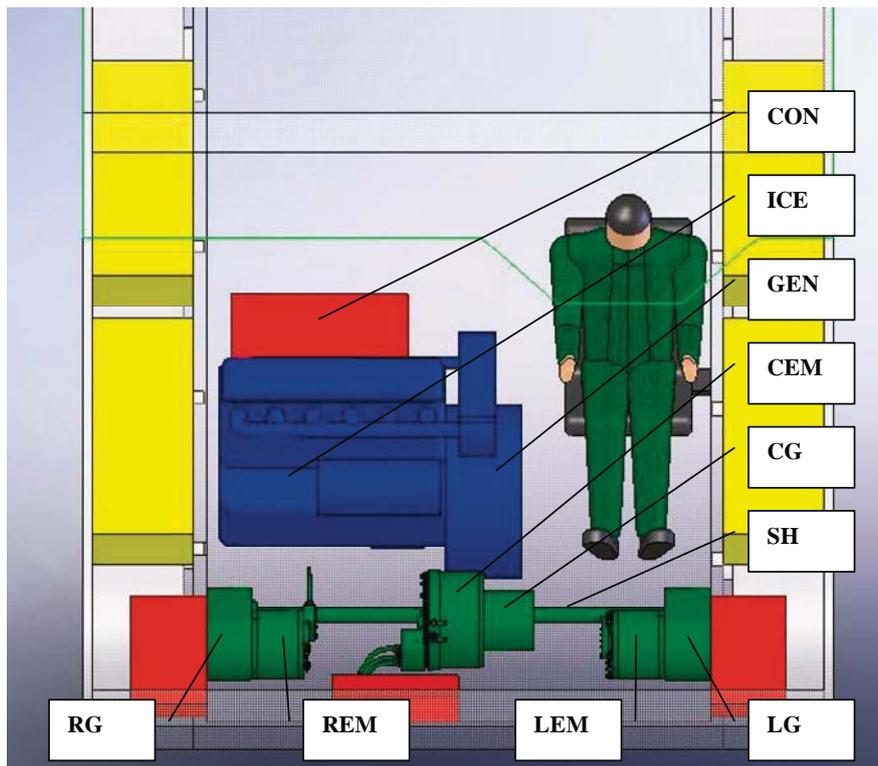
Hybrid electric drive components location: RG – right gearbox, REM – right electric motor, LEM – left electric motor, LG – left gearbox, SH – shaft, CG – central gearbox, CEM – central electric motor, GEN – generator, ICE – internal combustion engine, STE – control unit
